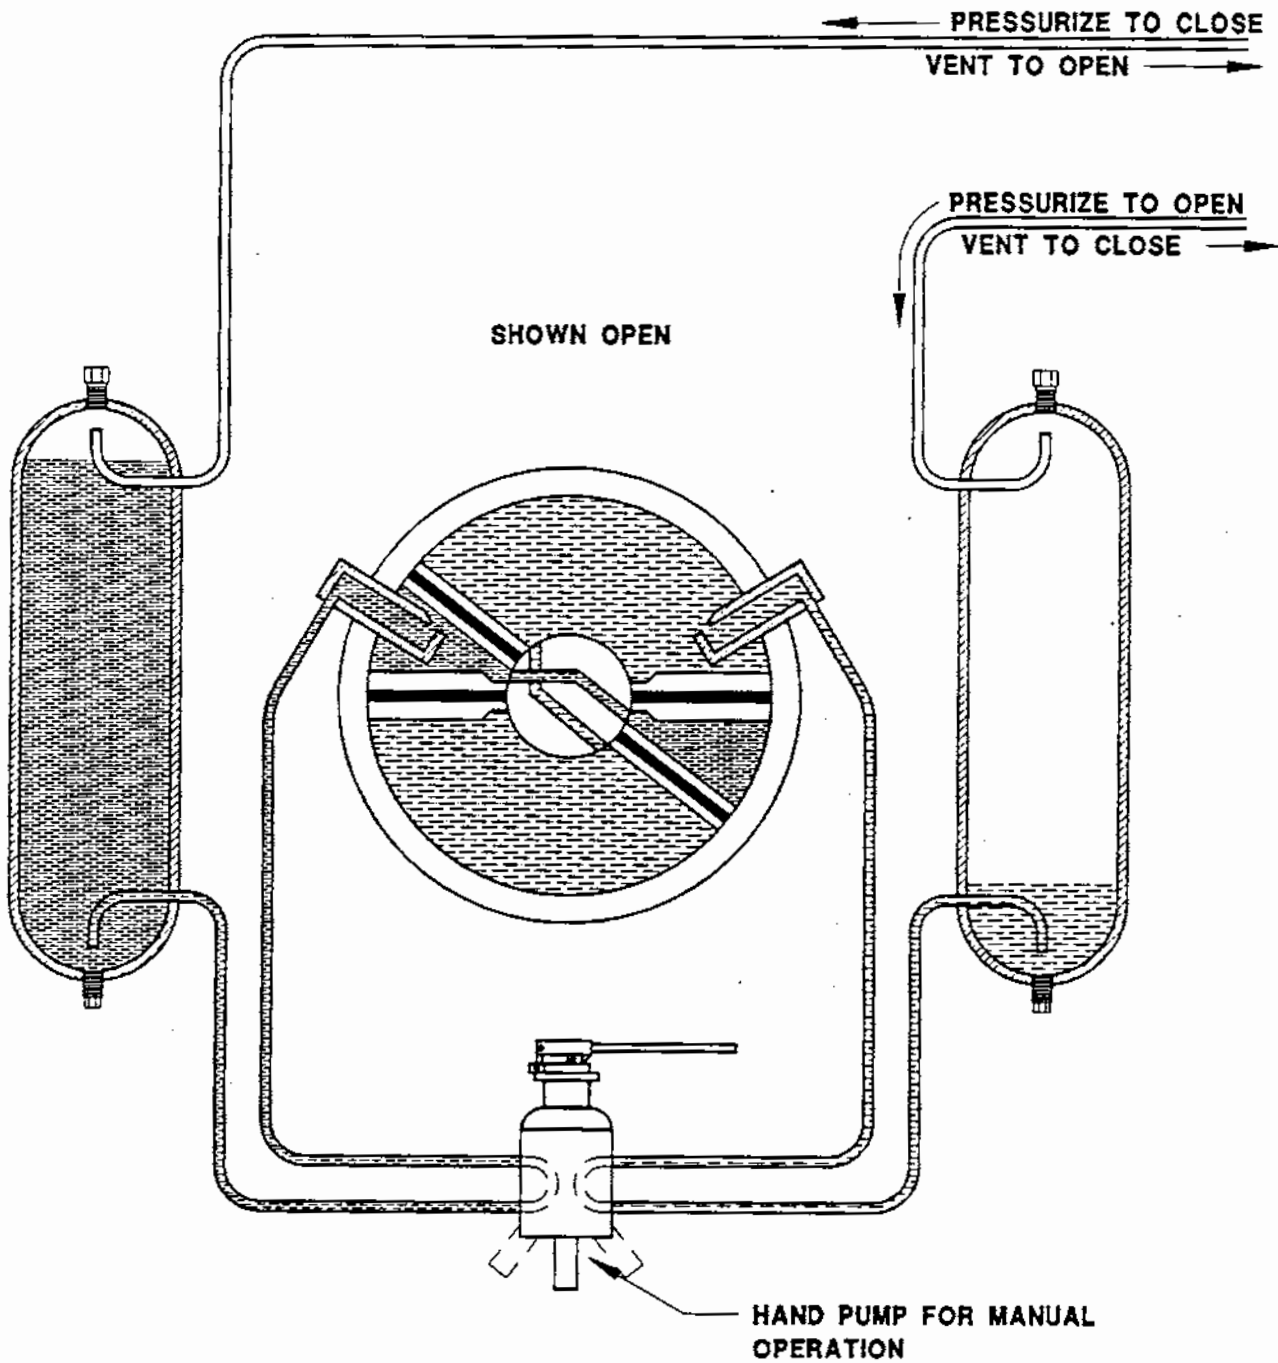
Pneumatic/Hydraulic Rotary Vane Operator - Cross Section¹²
